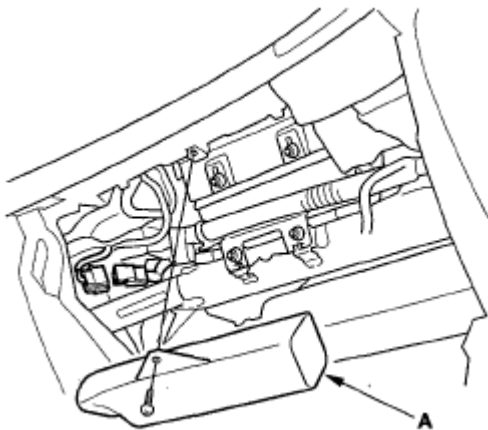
Identifying Front Passenger's Air Conditioning Duct
